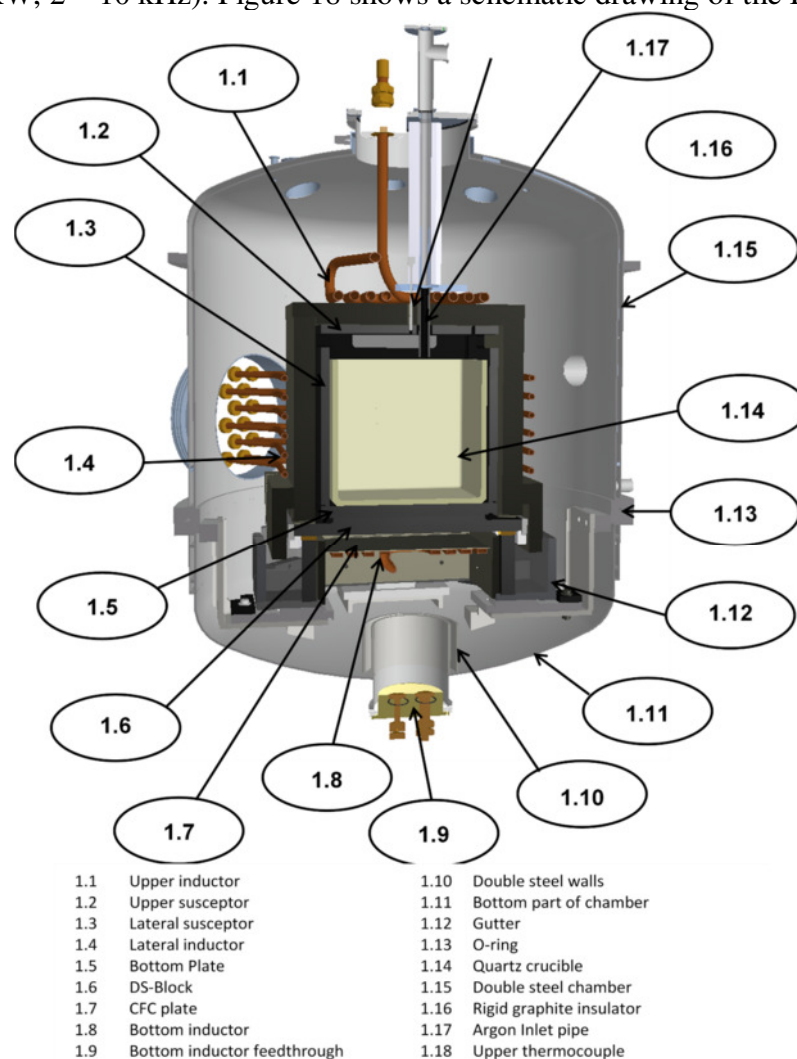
Schematic drawing of Demonstrator II at UNIPD
